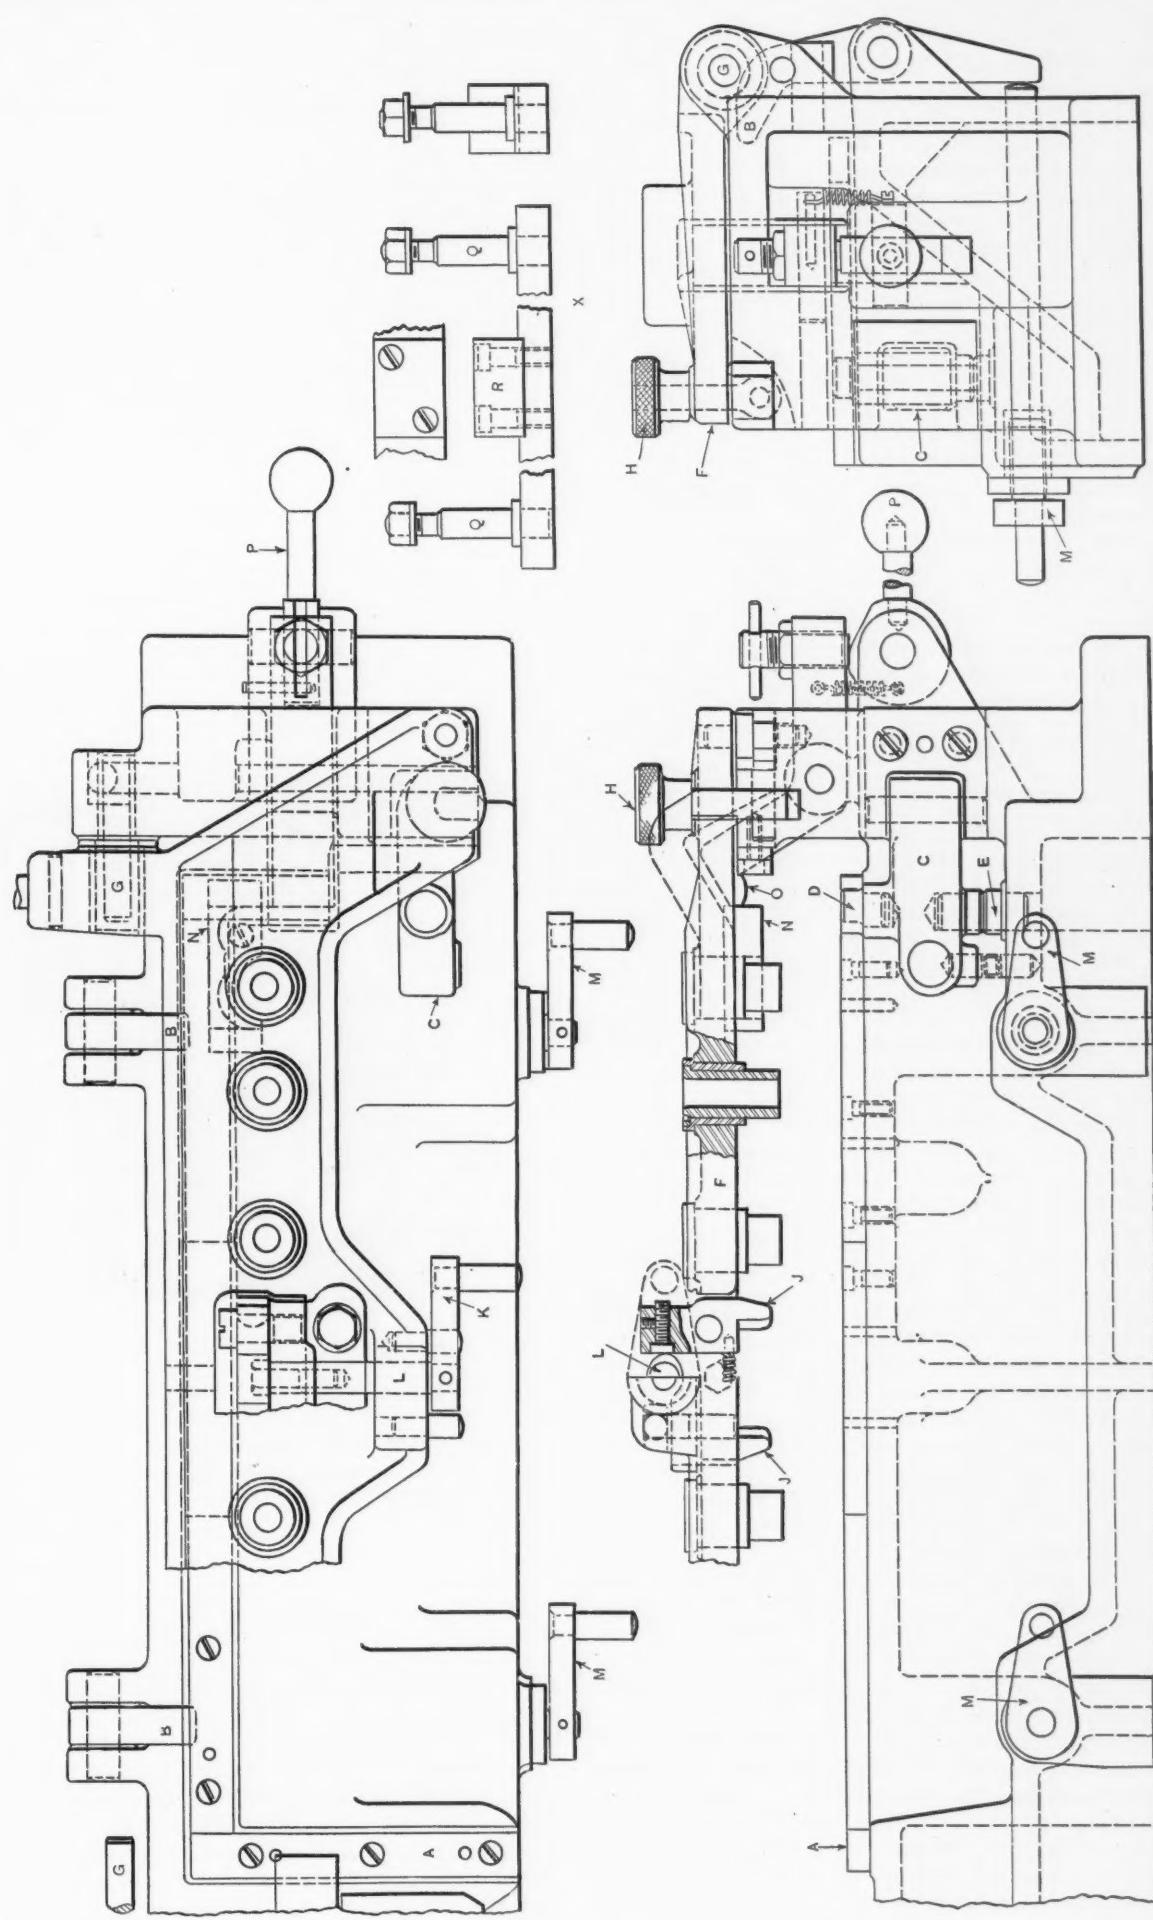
Cylinder Head Jig having a Number of Unusual Features for locating, supporting, and clamping the Casting
